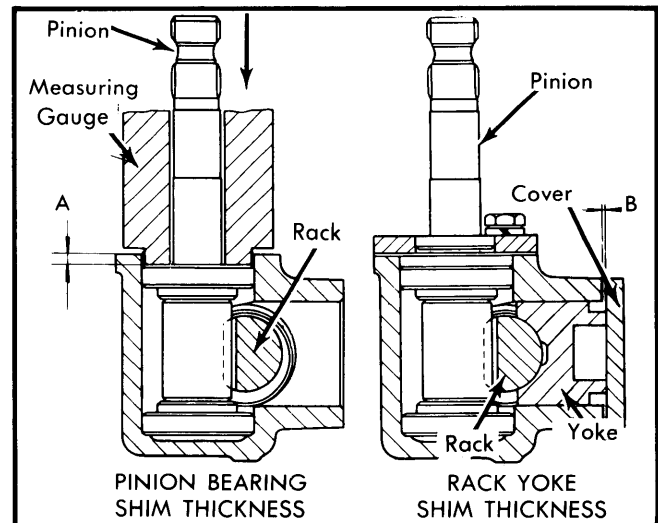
Measurement of Rack Yoke Shim Thickness and Pinion Bearing Shim Thickness
